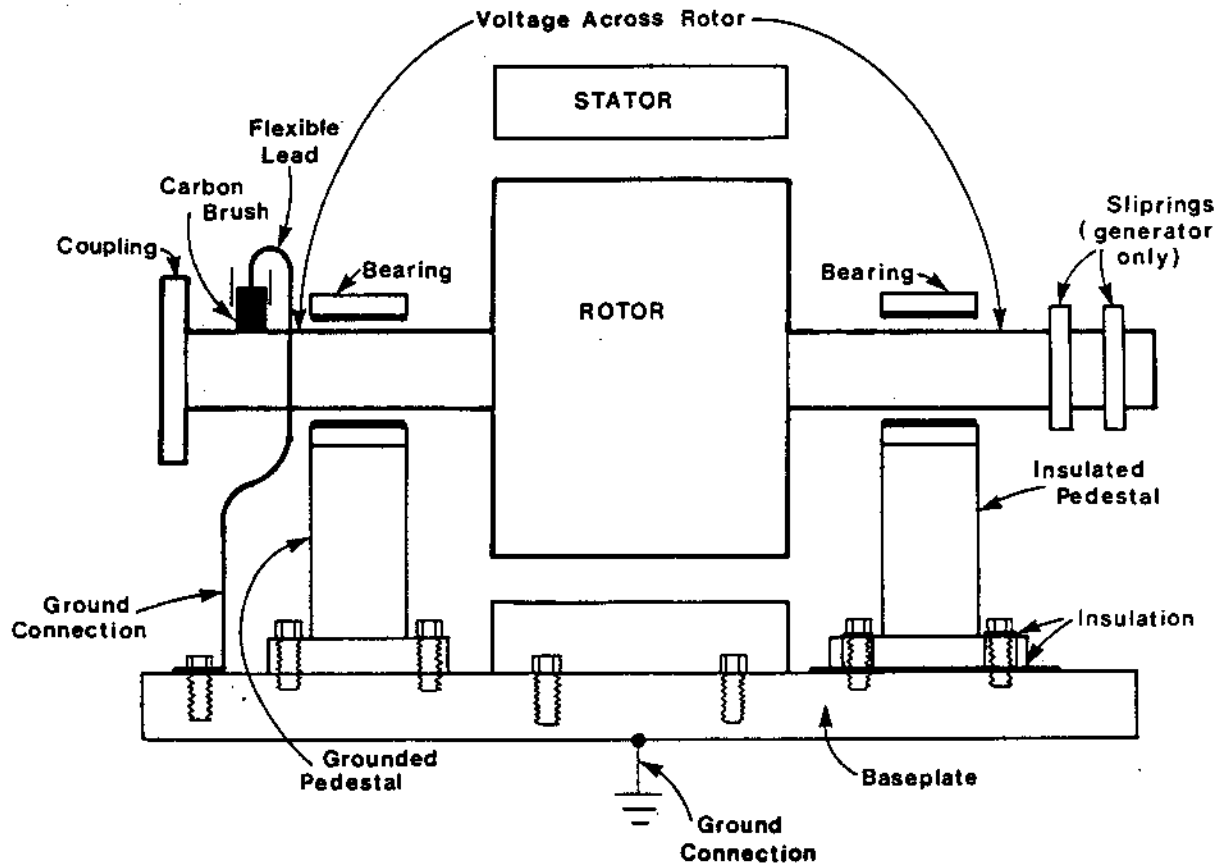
Grounding and Insulation Arrangements for a Large Motor or Generator Rotor
